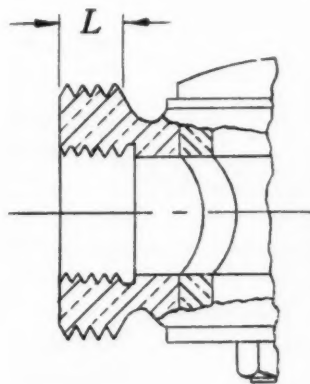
Fitting Thread for Use With Double Extra Strong Lead Flanged Pipe
